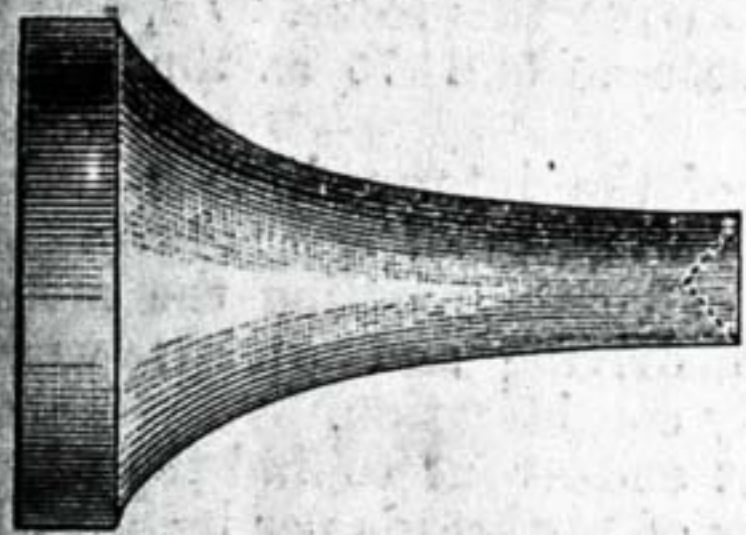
Shape of Piece of Turned Wood to hold Metal in place.
